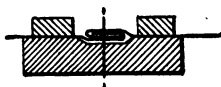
Diagram showing application of heat-absorbing blocks to prevent overheating in the welding of very thin sheets.
